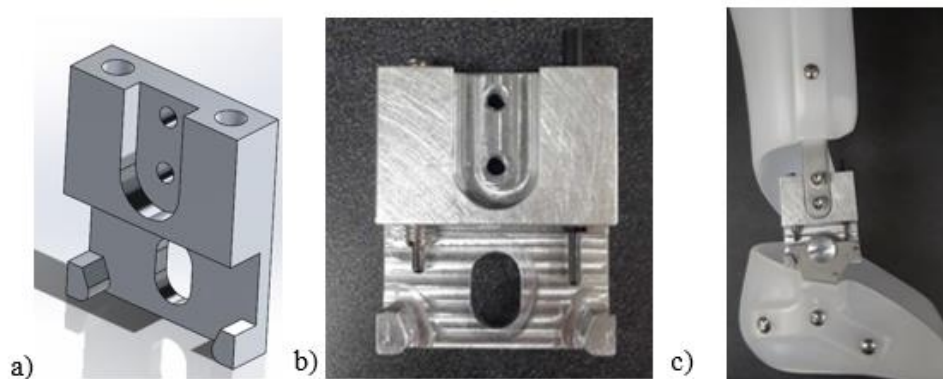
Final ankle joint body with SolidWorks isometric view (a), manufactured joint front view (b), and final joint integrated with the AFO (c).
